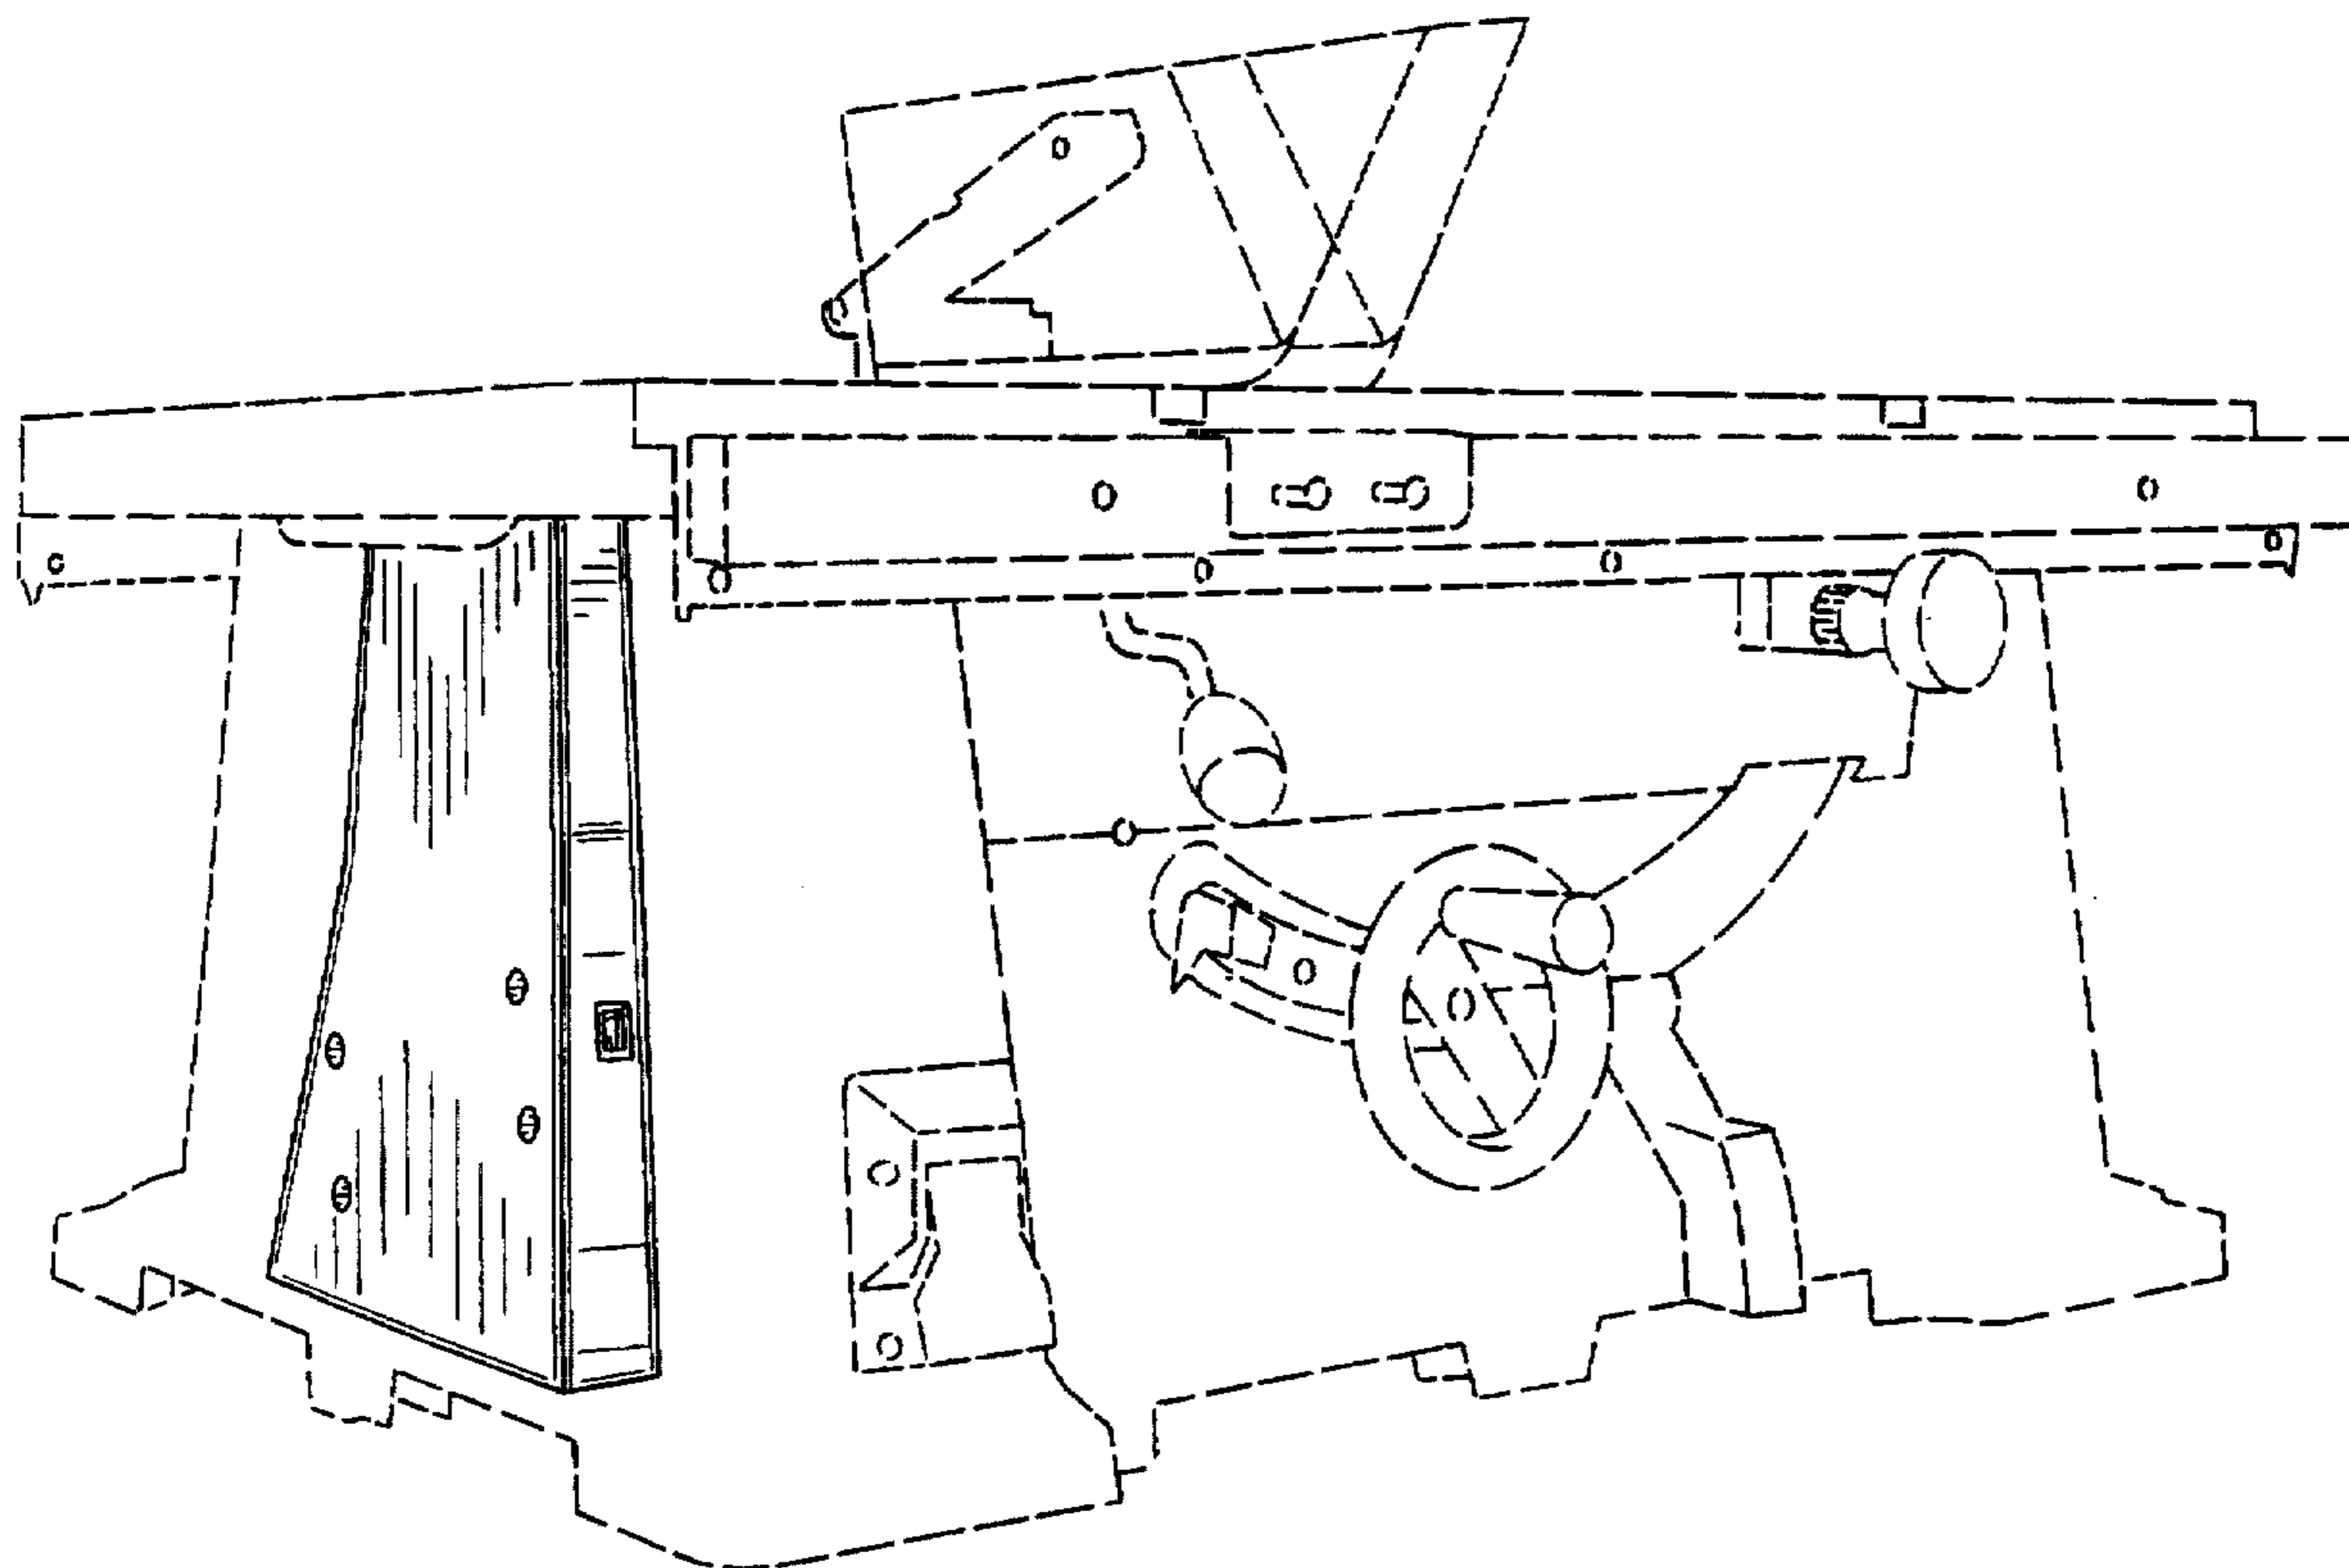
is a front perspective view from the left side of an embodiment of a miter gauge holder for a table saw showing our new design;
